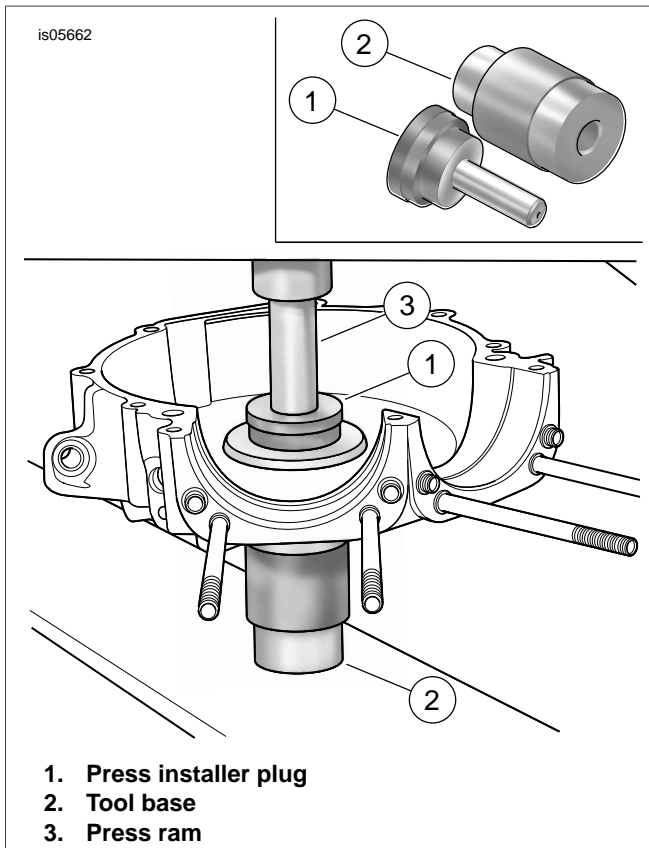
Sprocket Shaft Timken Bearing Cup Installer
